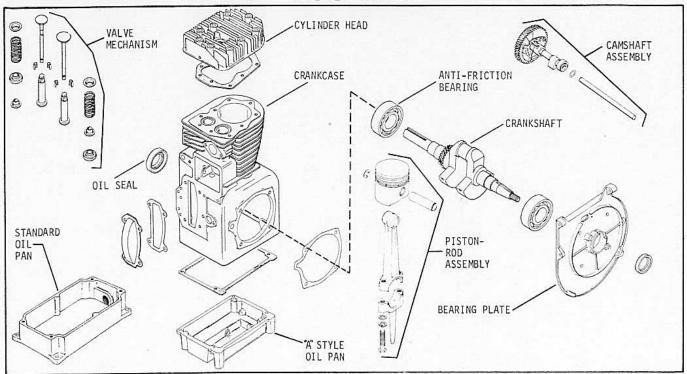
EXPLODED VIEW, MAJOR COMPONENTS OF TYPICAL ENGINE
